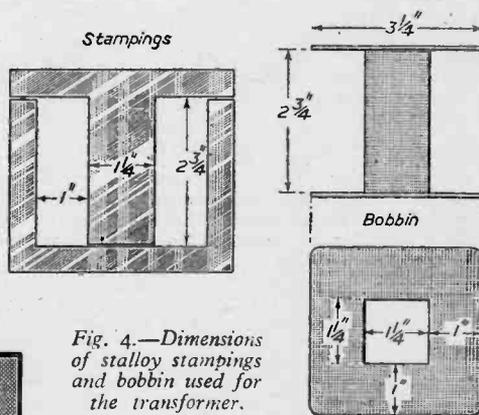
Dimensions of stampings and bobbin used for the transformer.
